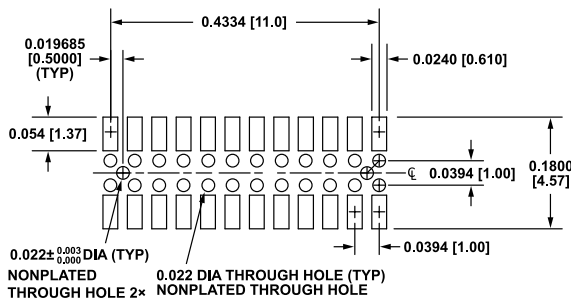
Suggested Layout and Mechanical Design when Using Samtec CLM-112-02-G-D-A for the Mating Connector
